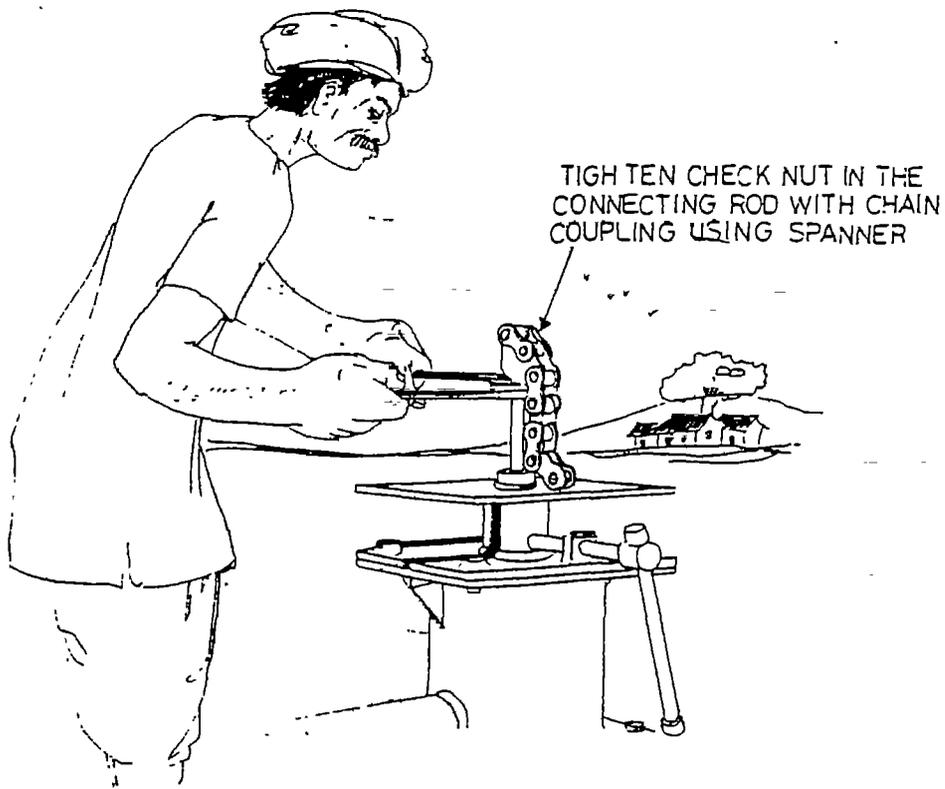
FIX CHAIN ON CONNECTING ROD
